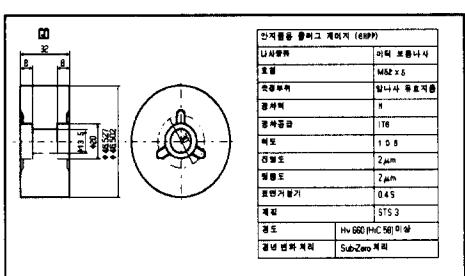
Plug gauge for metric coarse screw thread - Pitch diameter
